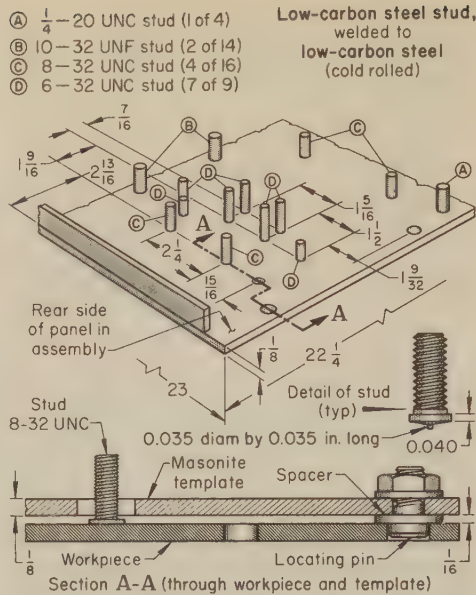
Mounting base on which studs for electrical components were capacitor-discharge stud welded, and the locating template used (Example 170)
